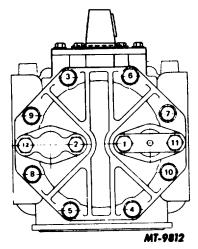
Cylinder Head Capscrew Tightening Sequence
